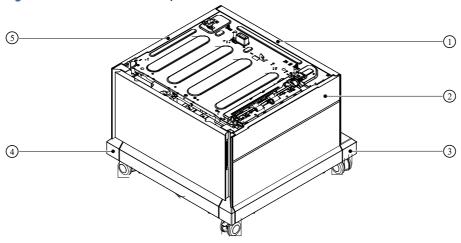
Cassette assemblies, 550-sheet paper feeder
